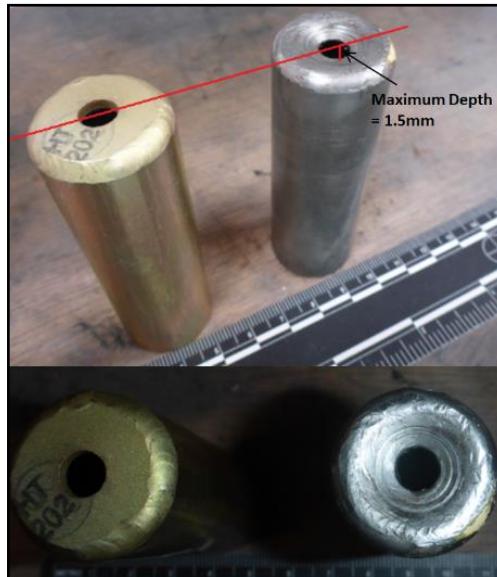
New retainer tube (gold-coloured) and old retainer tube
